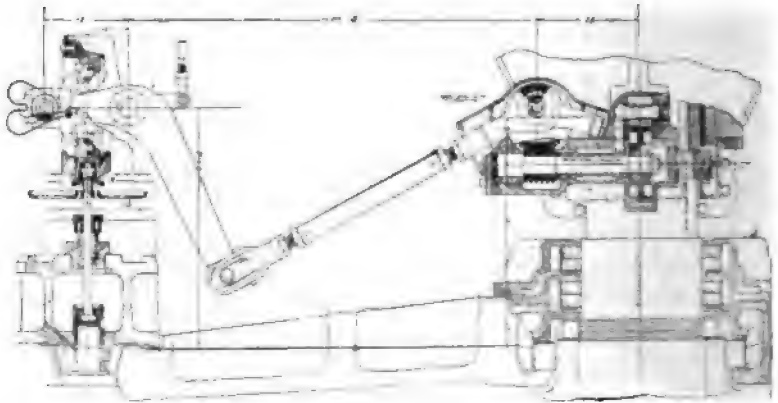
ELEVATION OF MECHANICAL VALVE GEAR OF CURTIS TURBINE
